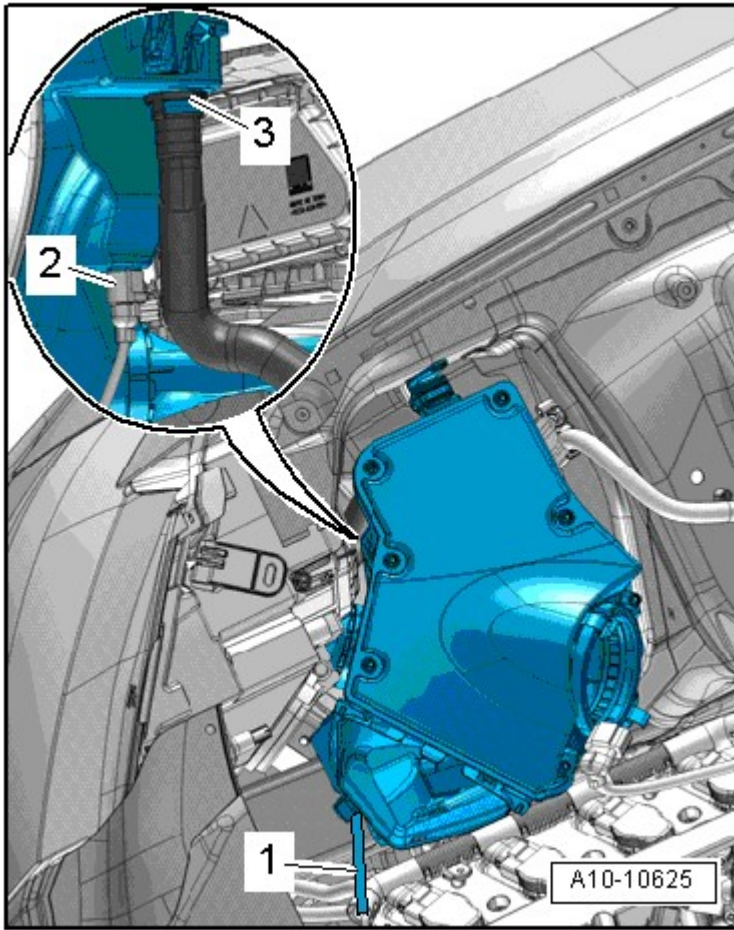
Intake Air Switch-Over Valve -N335- -2-
